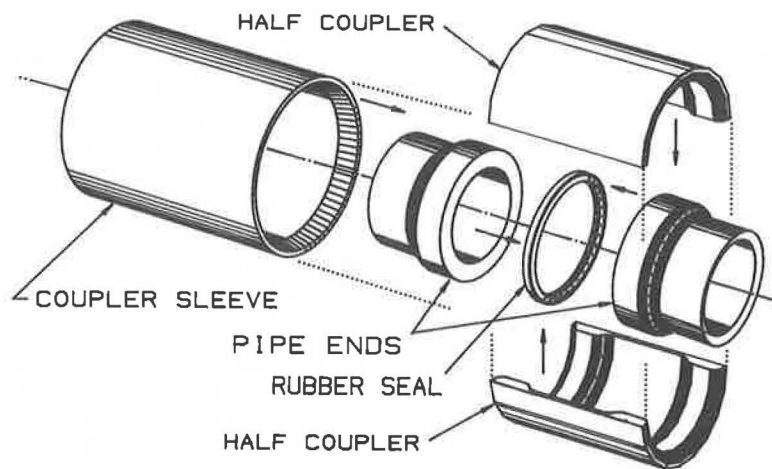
Exploded view of a high-strength composite coupler and seal assembly.
